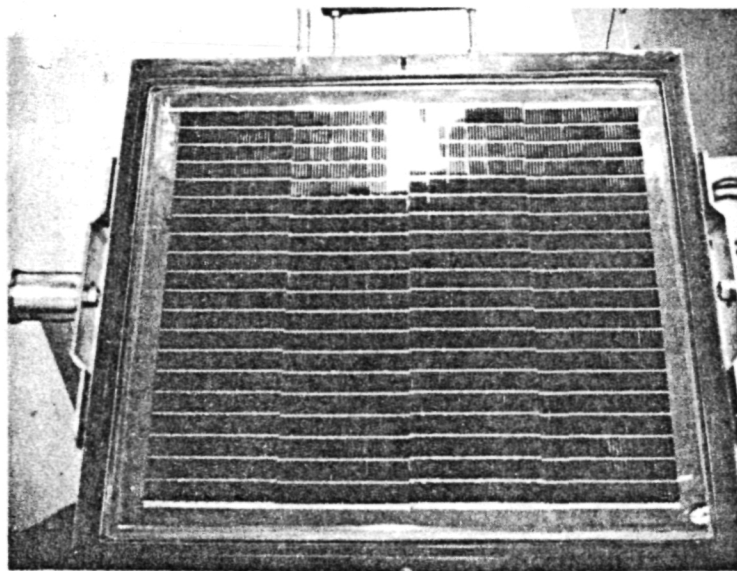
480-Cell Module on Lower Portion of Laminating Fixture in Trunnion Chart, After Removal of Module Assembly Fixture
